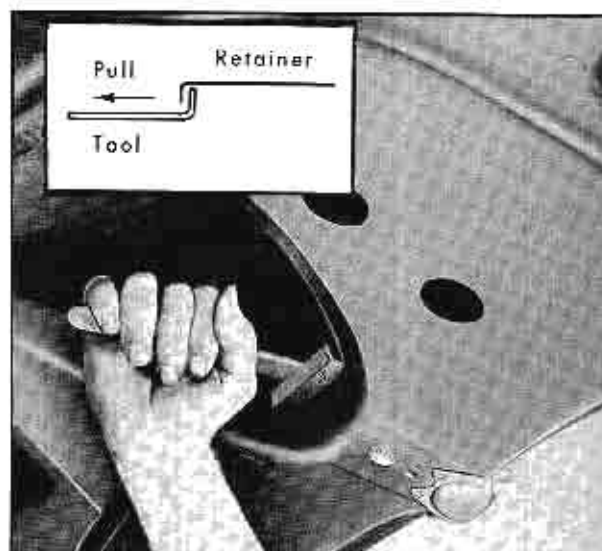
Removing Deck Lid Lock Cylinder Retainer
